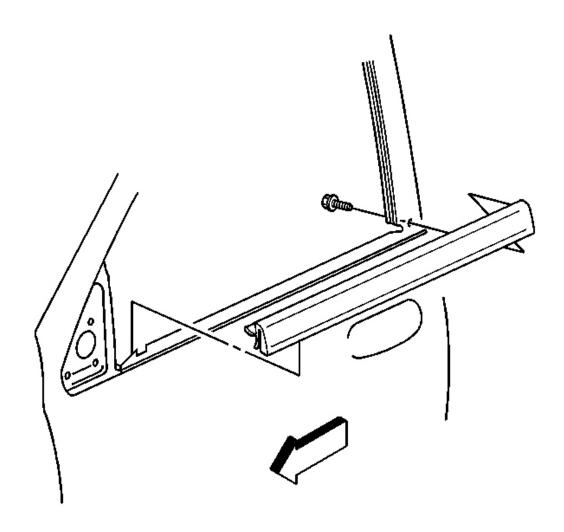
Identifying Sealing Strip (Front Door Window Belt Outer) Courtesy of GENERAL MOTORS CORP.
